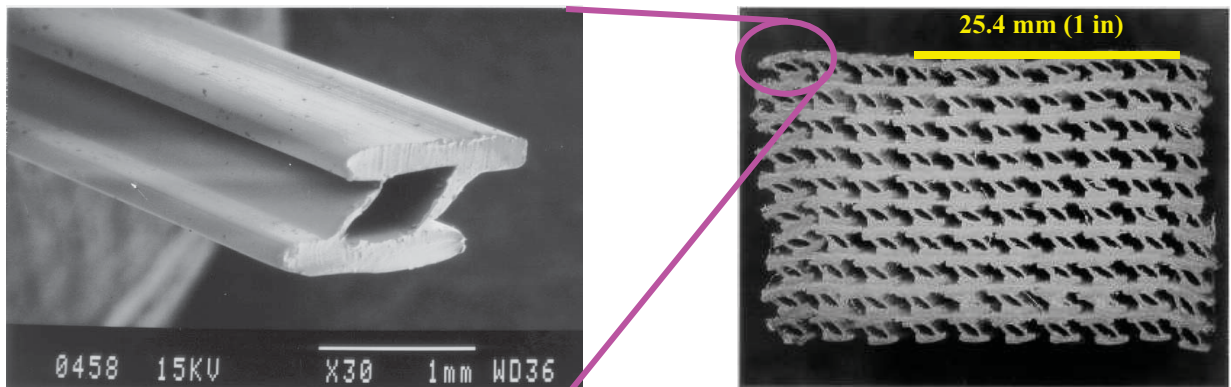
Extruded Nylon Simple Machine (Left); 100 Machines In 2-D Arrangement Before Matrix Infiltration
